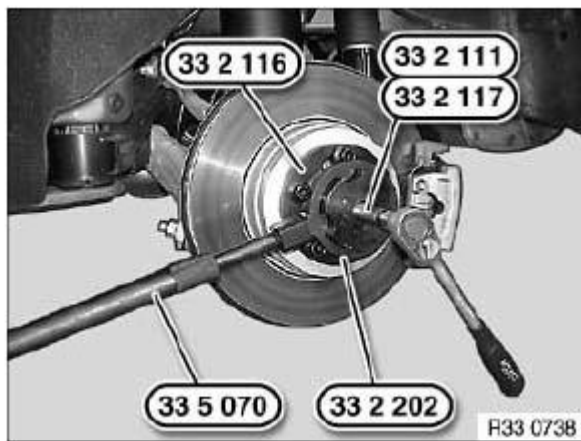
Identifying Special Tool (33 2 111, 33 2 117 And 33 2 116) With Wheel Studs To Drive Flange
